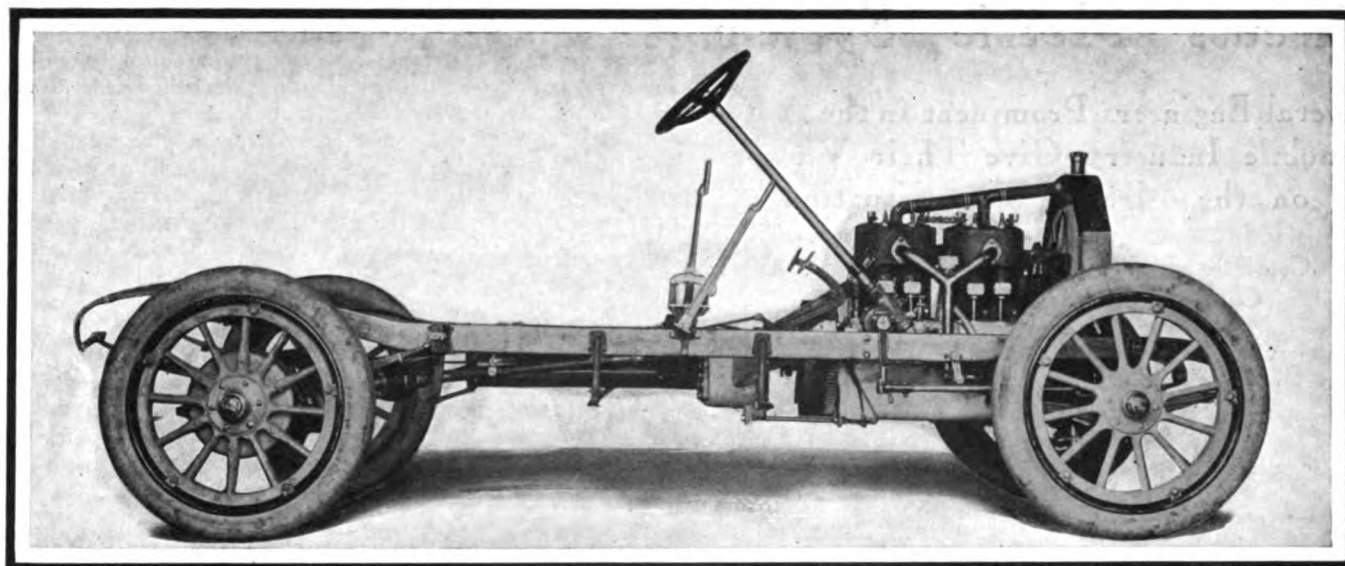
Stripped chassis of the Haynes car. Note teeth on the flywheel for starting system
